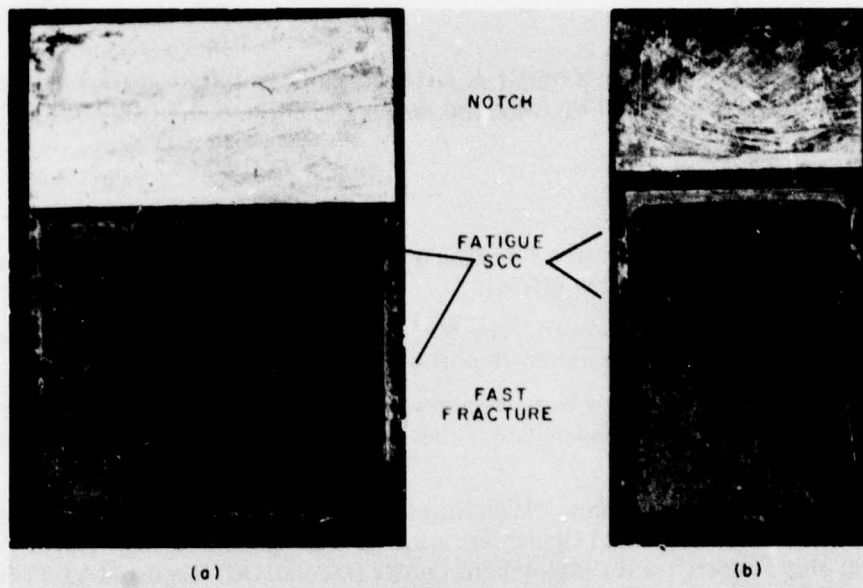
(a) Fracture surface of a full-thickness (38 mm) weld metal specimen (Code T) showing large differences in SCC propensity from the center of weld metal to the outer surfaces, and (b) fracture surface of a reduced-section (25 mm) weld metal specimen (Code T) showing a relatively straight stress-corrosion crack front
